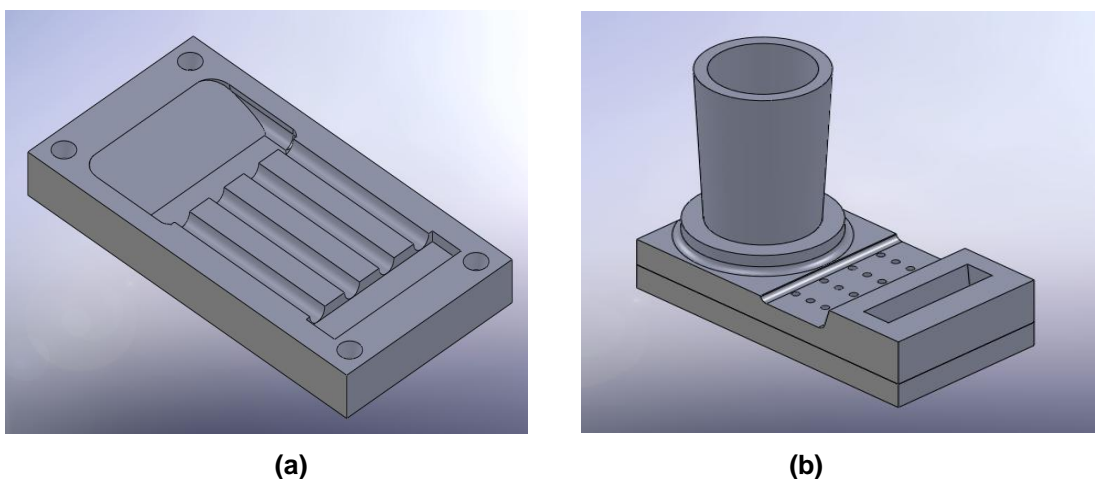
CAD drawings of the initial static mould design, showing (a) Bottom half of the mould and (b) 3D view of completed mould design.
